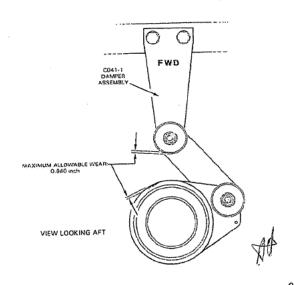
TAIL ROTOR DRIVE SHAFT DAMPER BEARING INSPECTION
